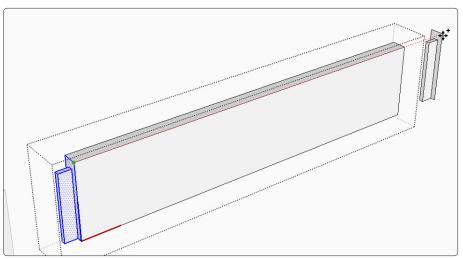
Use the Move/Copy Tool to copy the tenon and move it past the opposite end of the skirt component.
